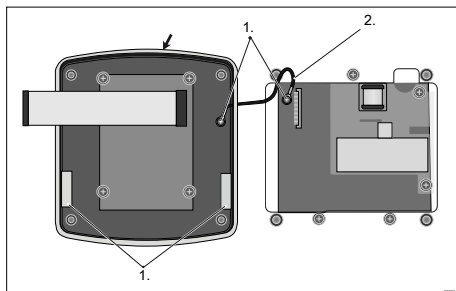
With control panel installation: Fit the profile seal onto the top part of the controller housing
